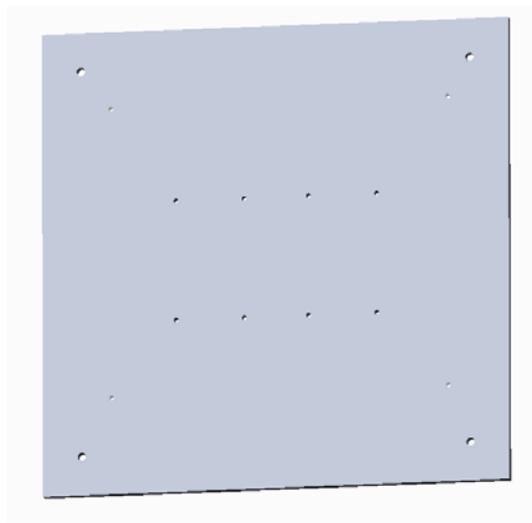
CAD for compressor mounting plate made in Creo Version 2.
